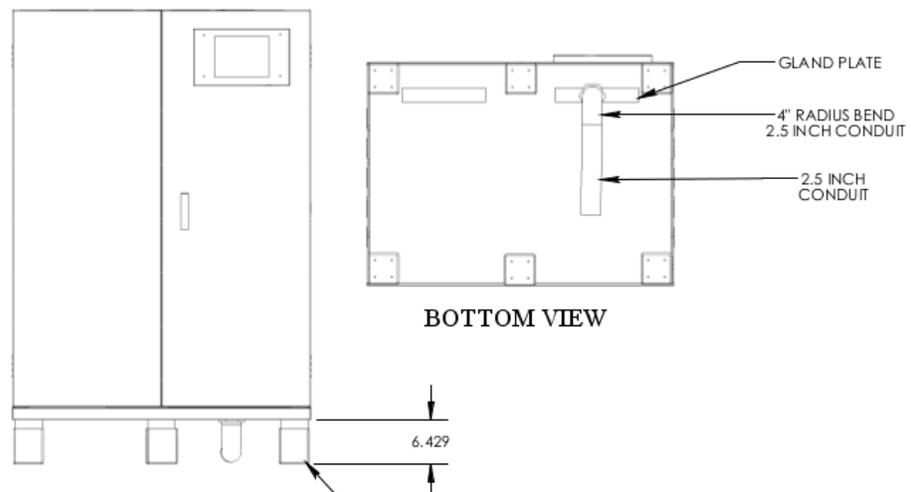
2.5 in. Cable Conduit with 4 in. Radius Bend.
